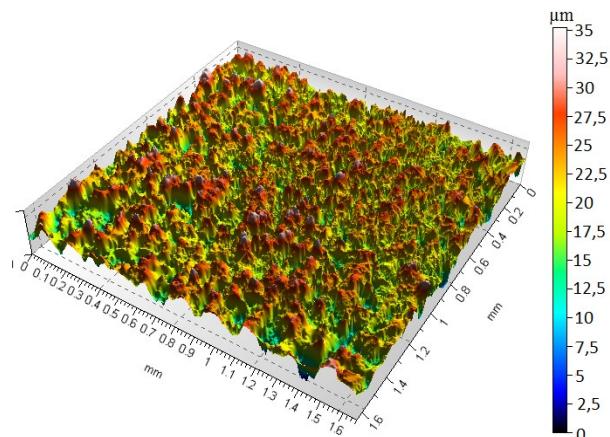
3D optical surfaces of the casting, *Sa* = 3.39 µm
